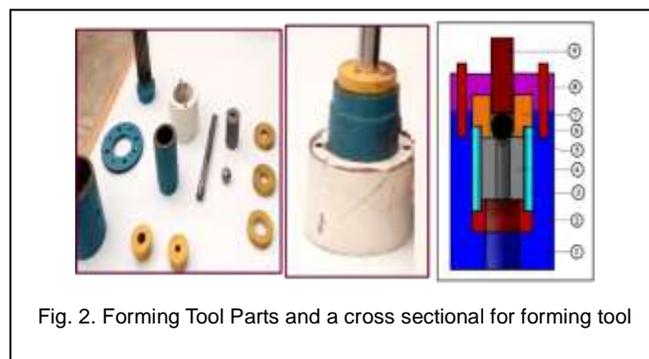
Forming Tool Parts and a cross sectional for forming tool
